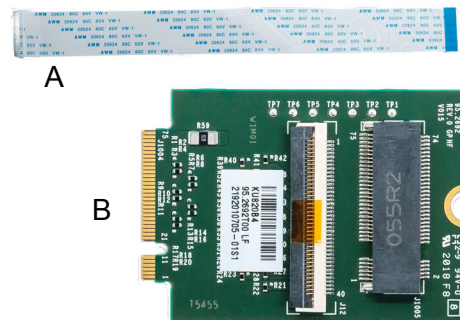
Additional Parts of 5G Modem Card Adapter Board Kit PCIe Variant
